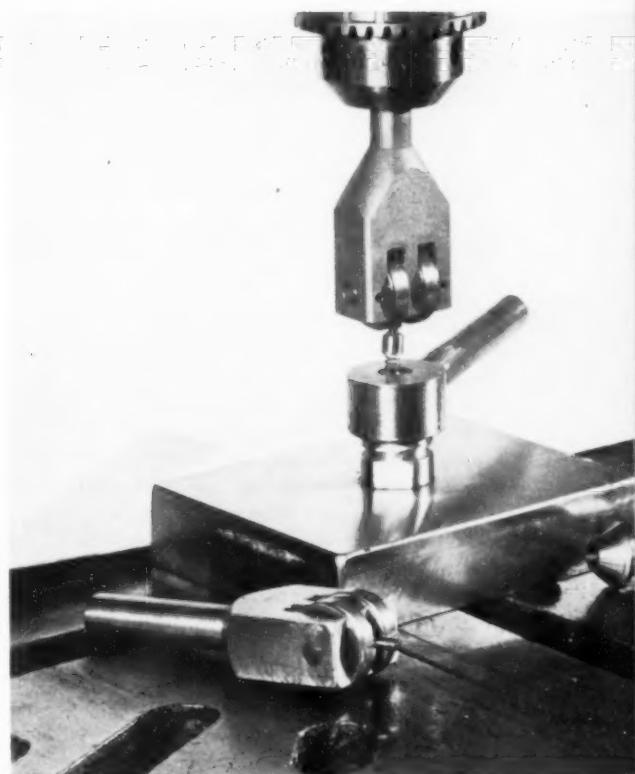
This tool holds spring assembly while forming flange which fastens unit together. Processing time is reduced from 22 minutes to 30 seconds.
